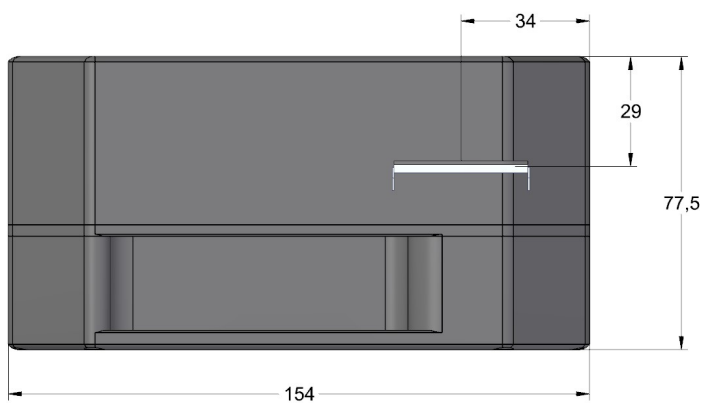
G3 camera with standard cooling and internal filter wheel side view
